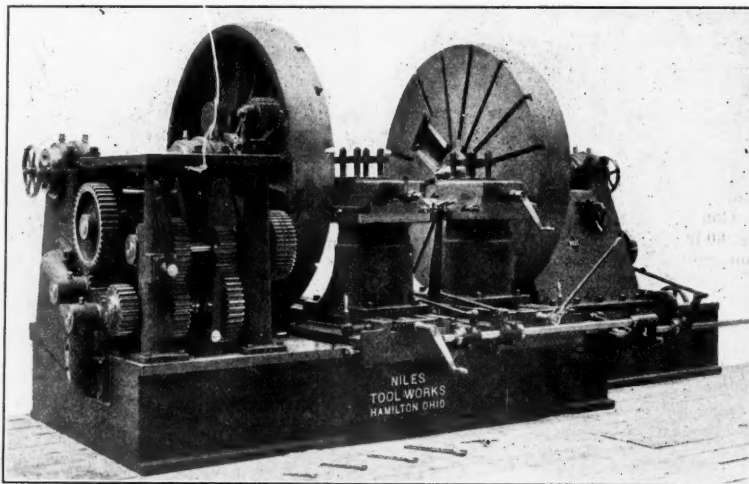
Niles-Bement-Pond 90-in. Wheel Lathe.
